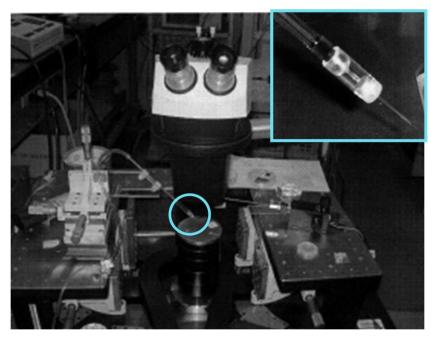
16: Vacuum assisted pick & place assembly setup. The micro-pipette that picks up the laser platelets with an applied vacuum is shown in the inset.
